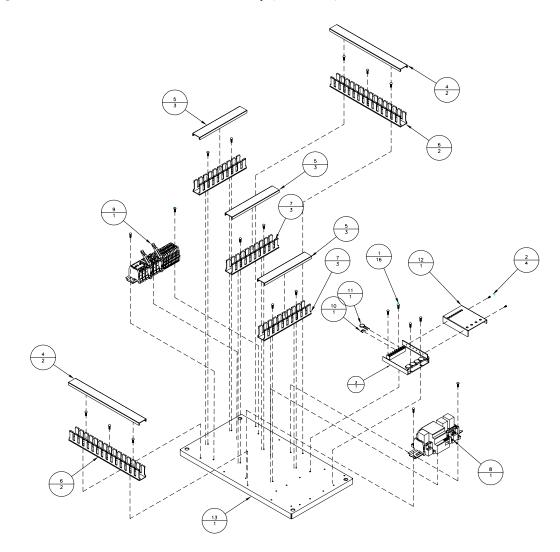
Instrument Panel Assembly (BK425) (706341A)
